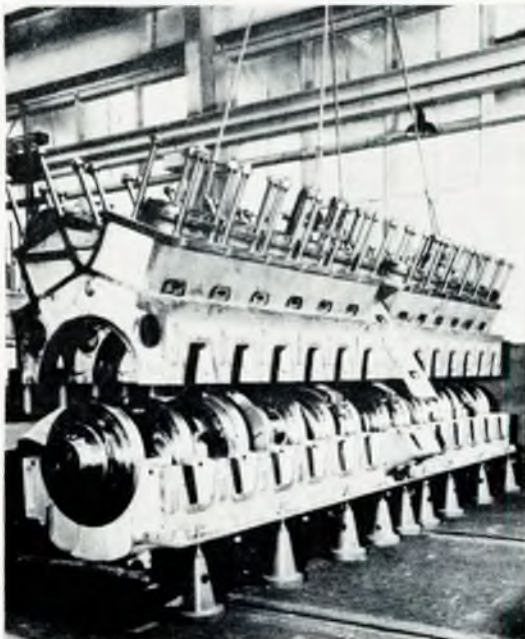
Assembling of crankshaft and casing V12V26, 5/30
